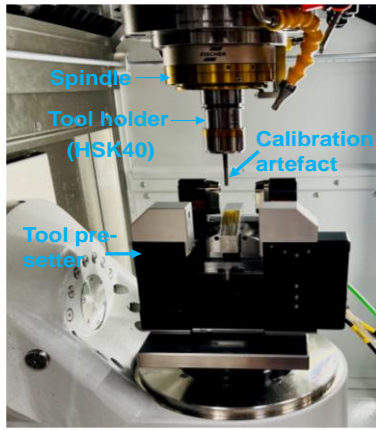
Experimental setup of the camera-based tool pre-setting optical system mounted on the rotating table of the machine tool (KERN Micro Vario).
